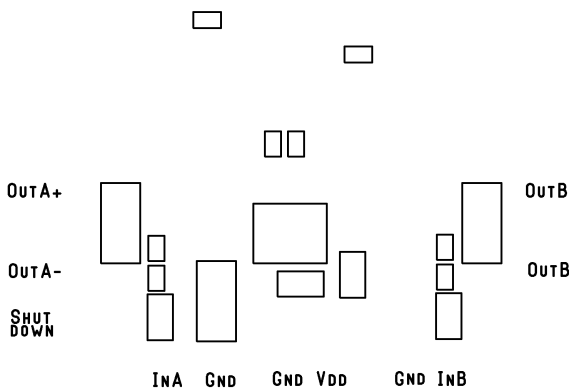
IAP PC board layout: Component-side Silkscreen
